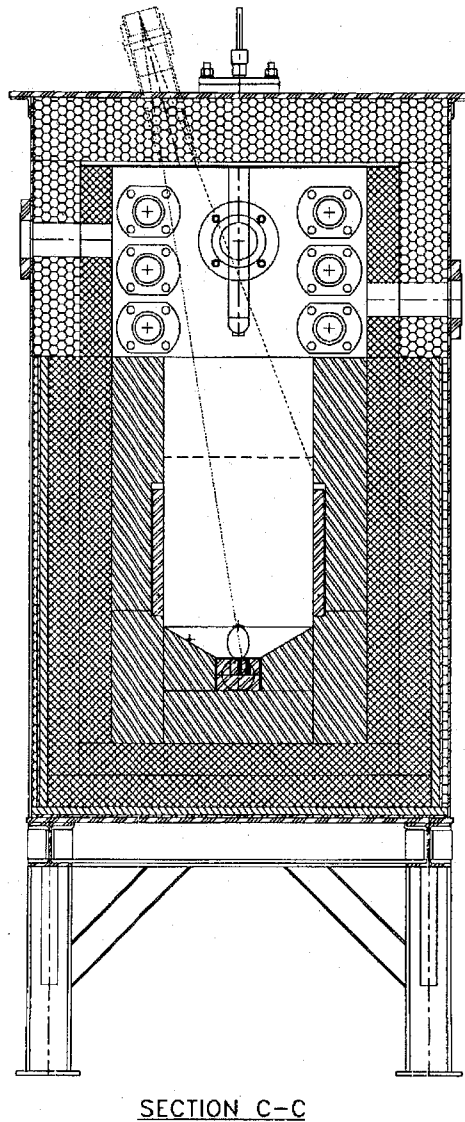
(c). Cross-section through the DM100-WV melter—Section CC.
